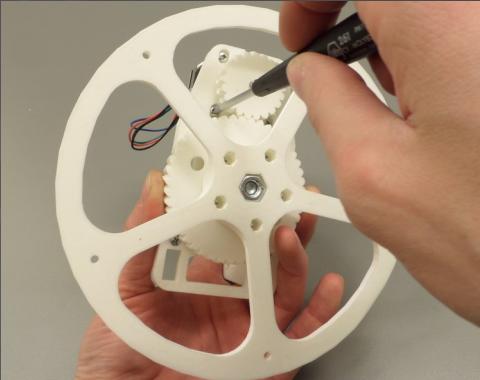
Fit the motor with gear, and tighten the M3 screws keeping the motor in place.
